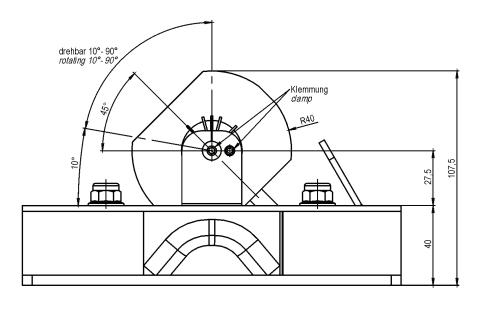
Dimensioned drawing ball sensor Type NOS0H0V200
